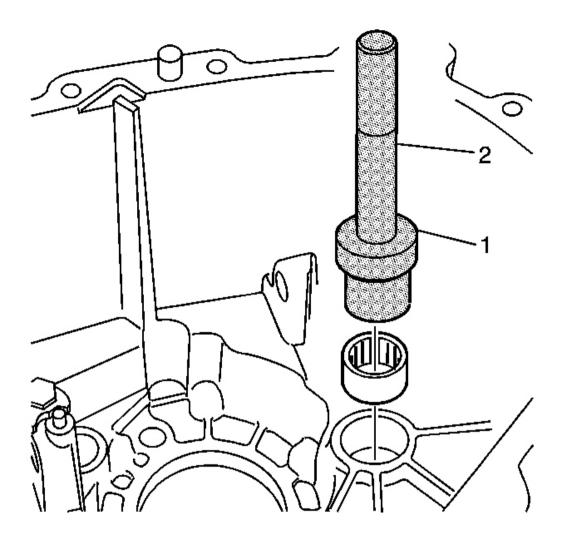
Installing Intermediate Shaft Needle Bearing Courtesy of GENERAL MOTORS CORP.
